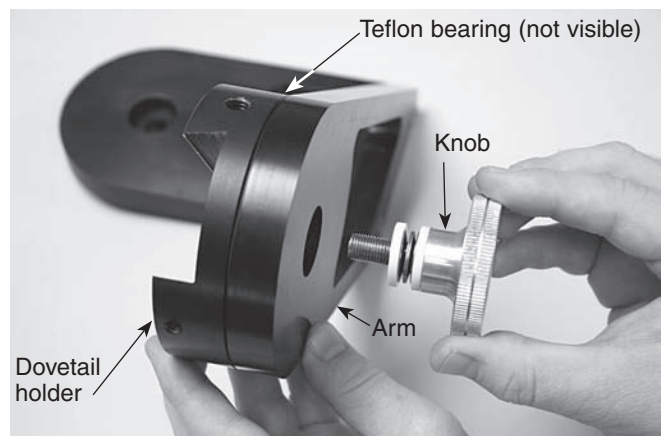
The dovetail holder seats into the arm with the Teflon bearing in between.
